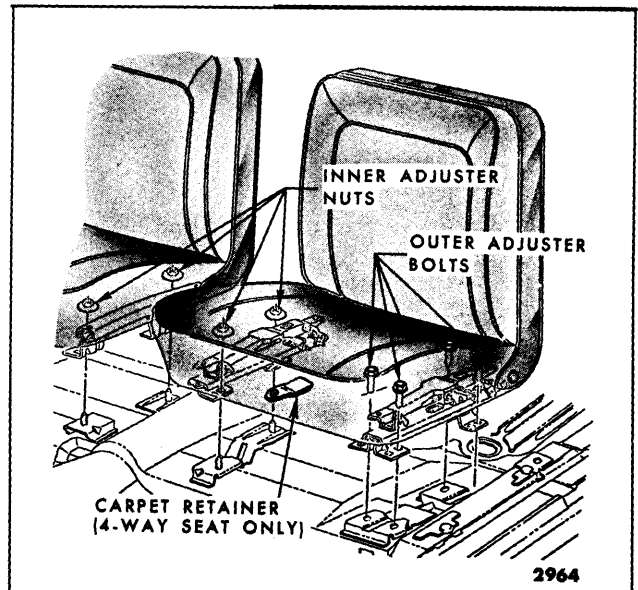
Bucket Seat Floor Pan Attachment - "B, C & E" Styles - Bucket Seats
